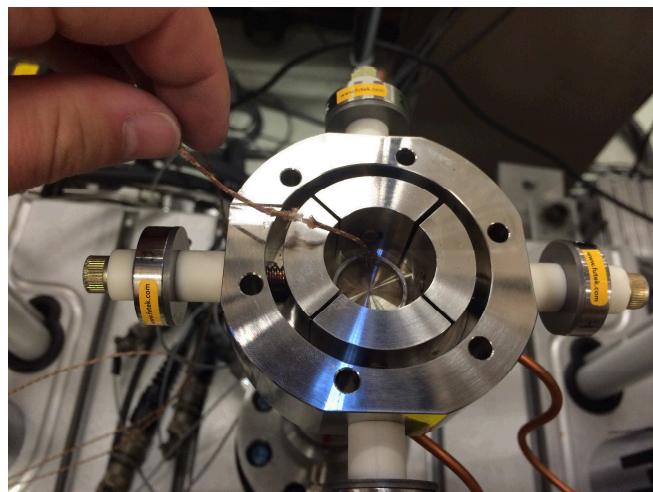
Photograph showing radially loaded laser weld specimen mounted in fixtures.
